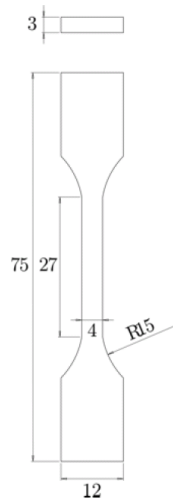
Tensile test geometry (dimensions in millimetres) [28]
